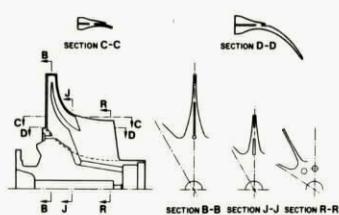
Sketch of a Radial Turbine Impeller with Convection Cooling (UACL)
